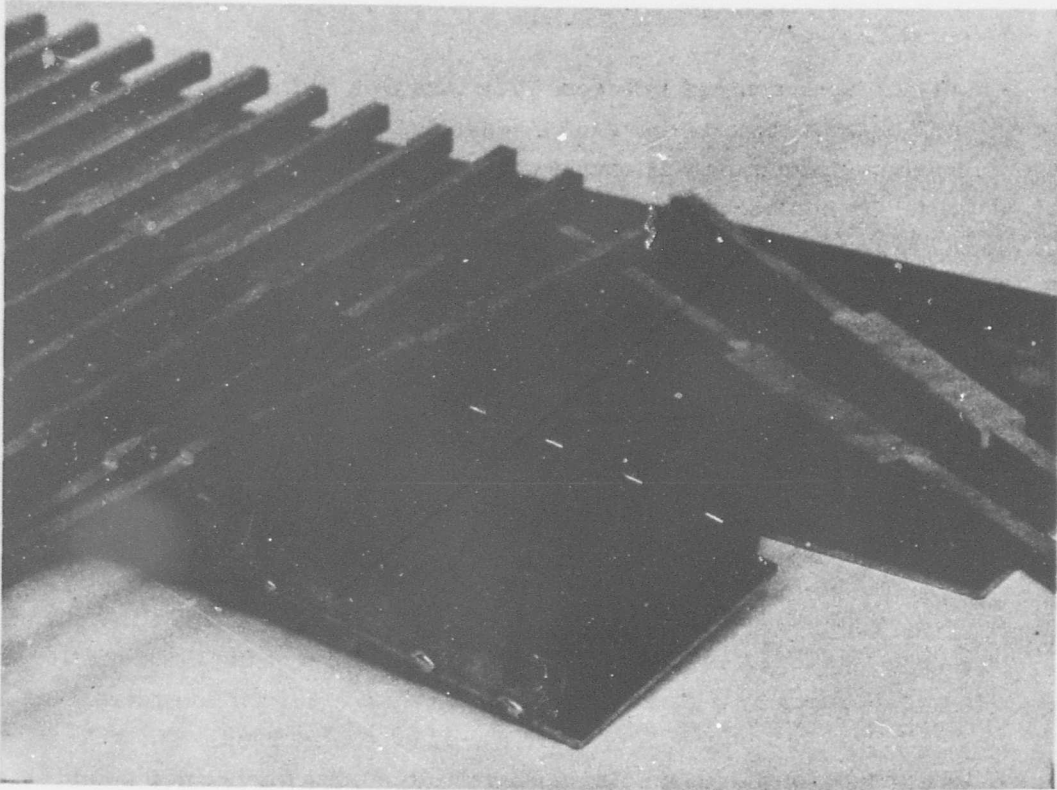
Pre-brazing assembly of thick ladder filter.
